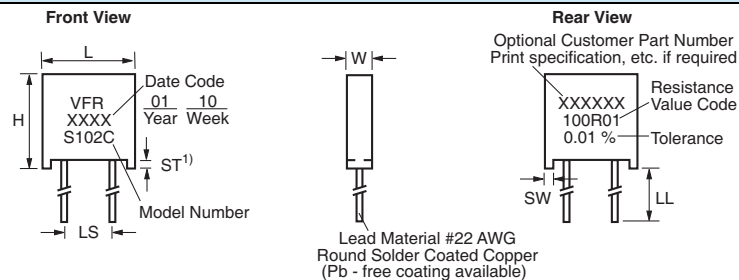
STANDARD IMPRINTING AND DIMENSIONSNote
